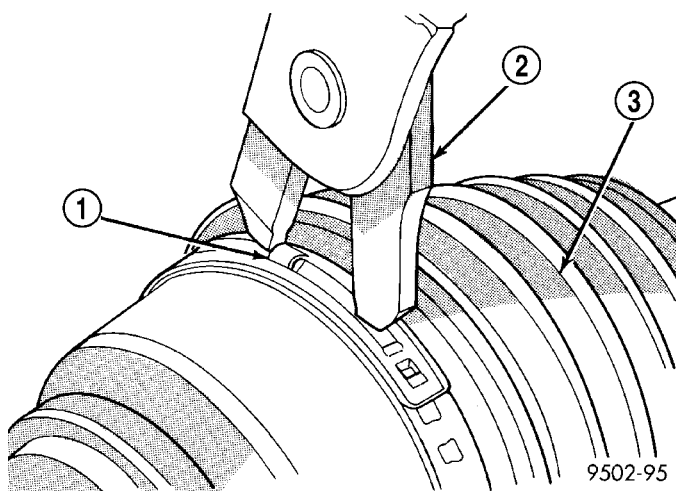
Clamping Tool Installed on Sealing Boot Clamp
